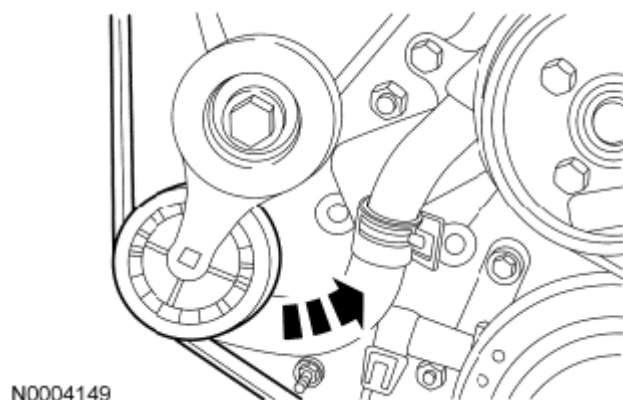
Rotating Accessory Drive Belt Tensioner Counterclockwise
